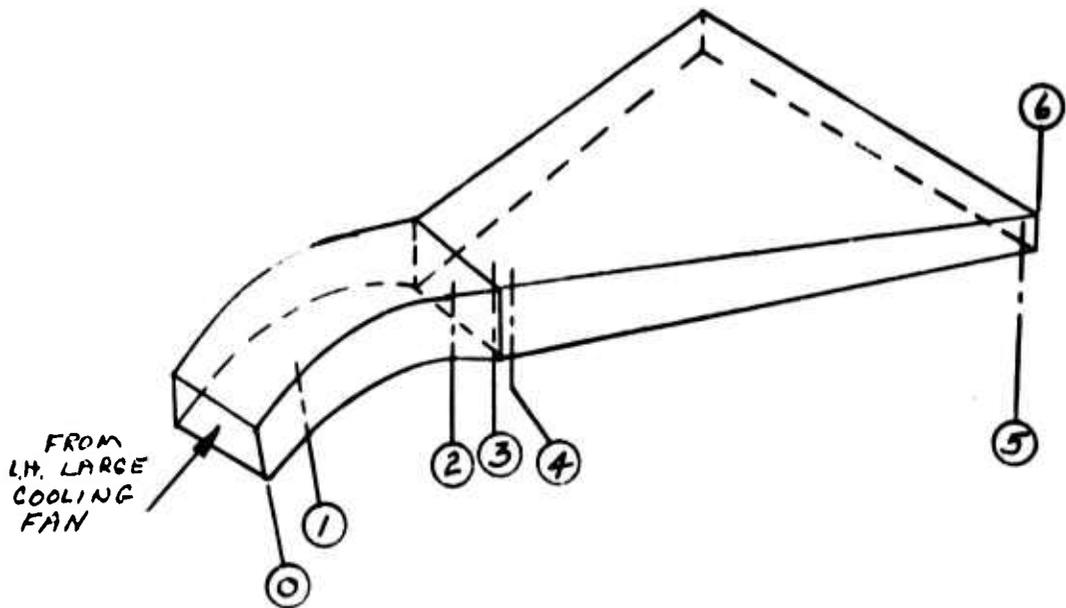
Cooling Air Duct Definition - L.H. Large Cooling Fan to Center Fuselage
